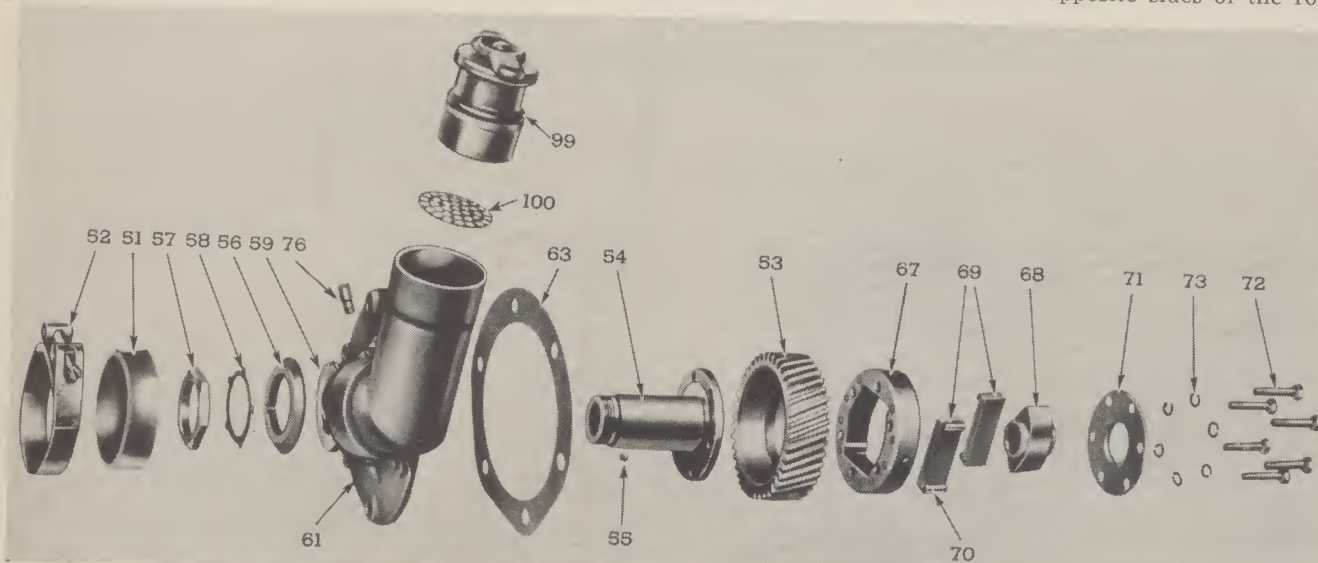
B—GM engine blower drive gear unit details and relative location of components.
